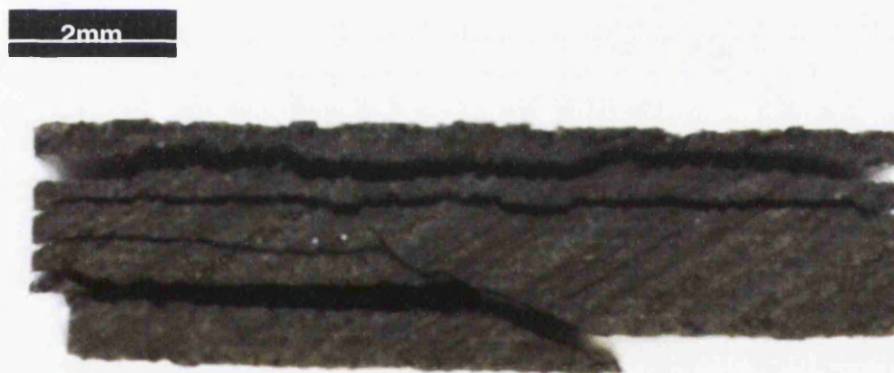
Short beam shear coupon showing multiple shear failures.
